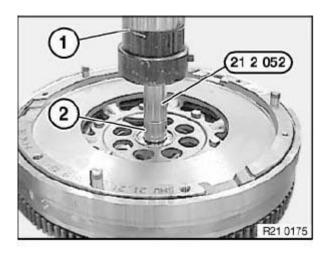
Pressing Roller Bearing Into Dual-Mass Flywheel Using Hydraulic Press Courtesy of BMW OF NORTH AMERICA, INC.
